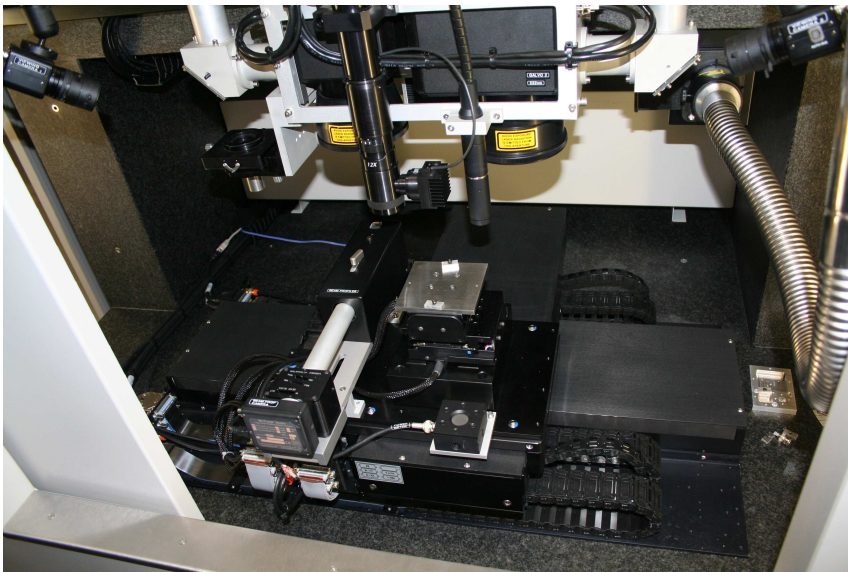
Photo showing the 12-axis CNC configuration. The X,Y,A,B axis goniometer assembly shown (bottom) is mounted on granite base and carries the sample jig. The vertical Z-axis carries the two dual head optical GX,GY galvanometer mirror axes.(top)
